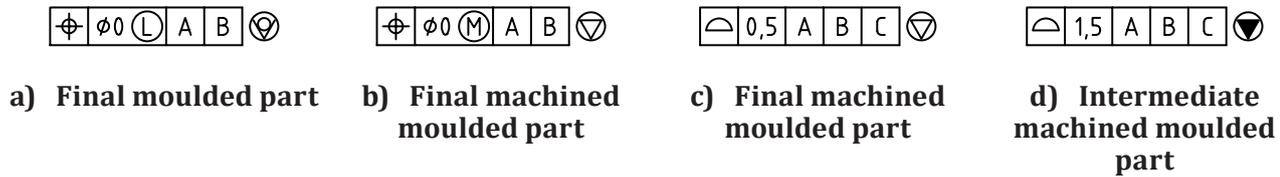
Examples of geometrical tolerances with datum references
